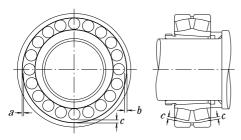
Measuring Clearance in Large Spherical Roller Bearing
